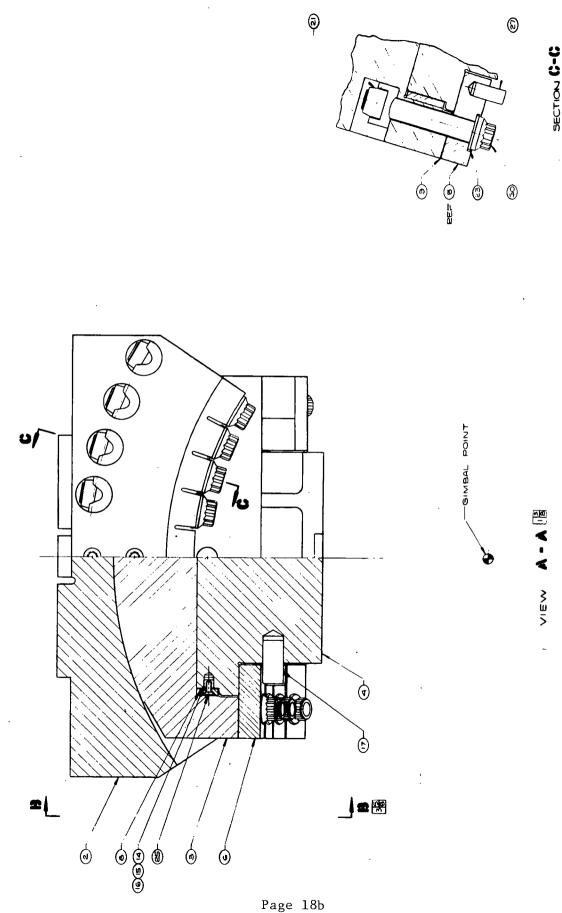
Gimbal Assembly (D/N 1162108) (Sheet 1 of 3)
